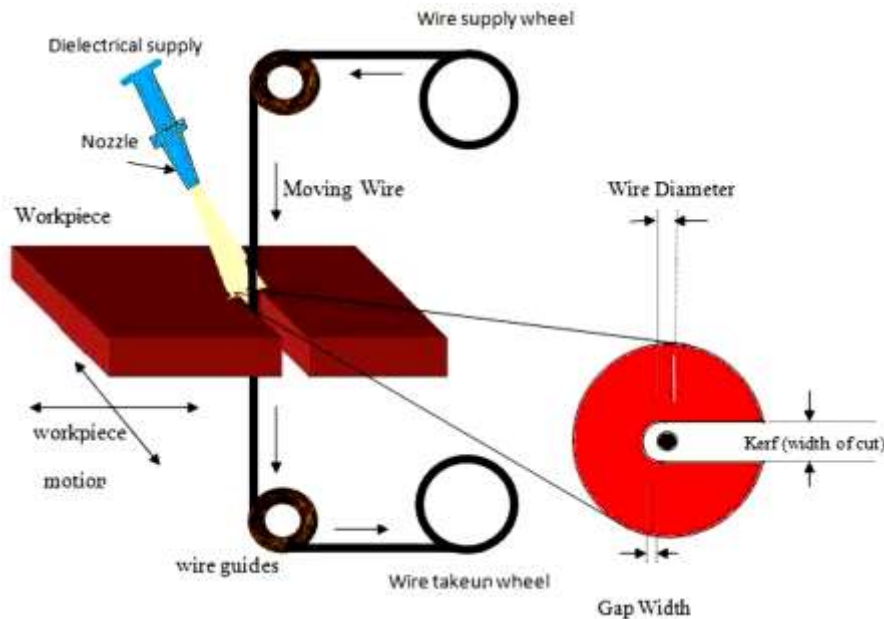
Schematic diagram of Wire Cut Electro Discharge Machining [8]
